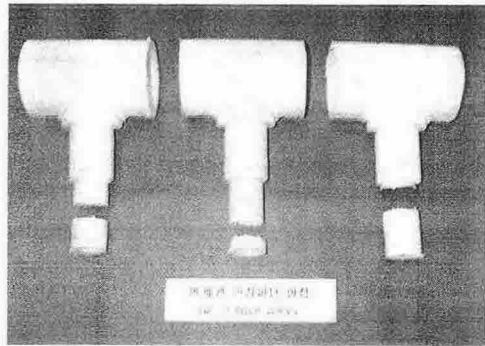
Fracture shape of saddle fusion welding fusion welding PE pipe PE pipe
